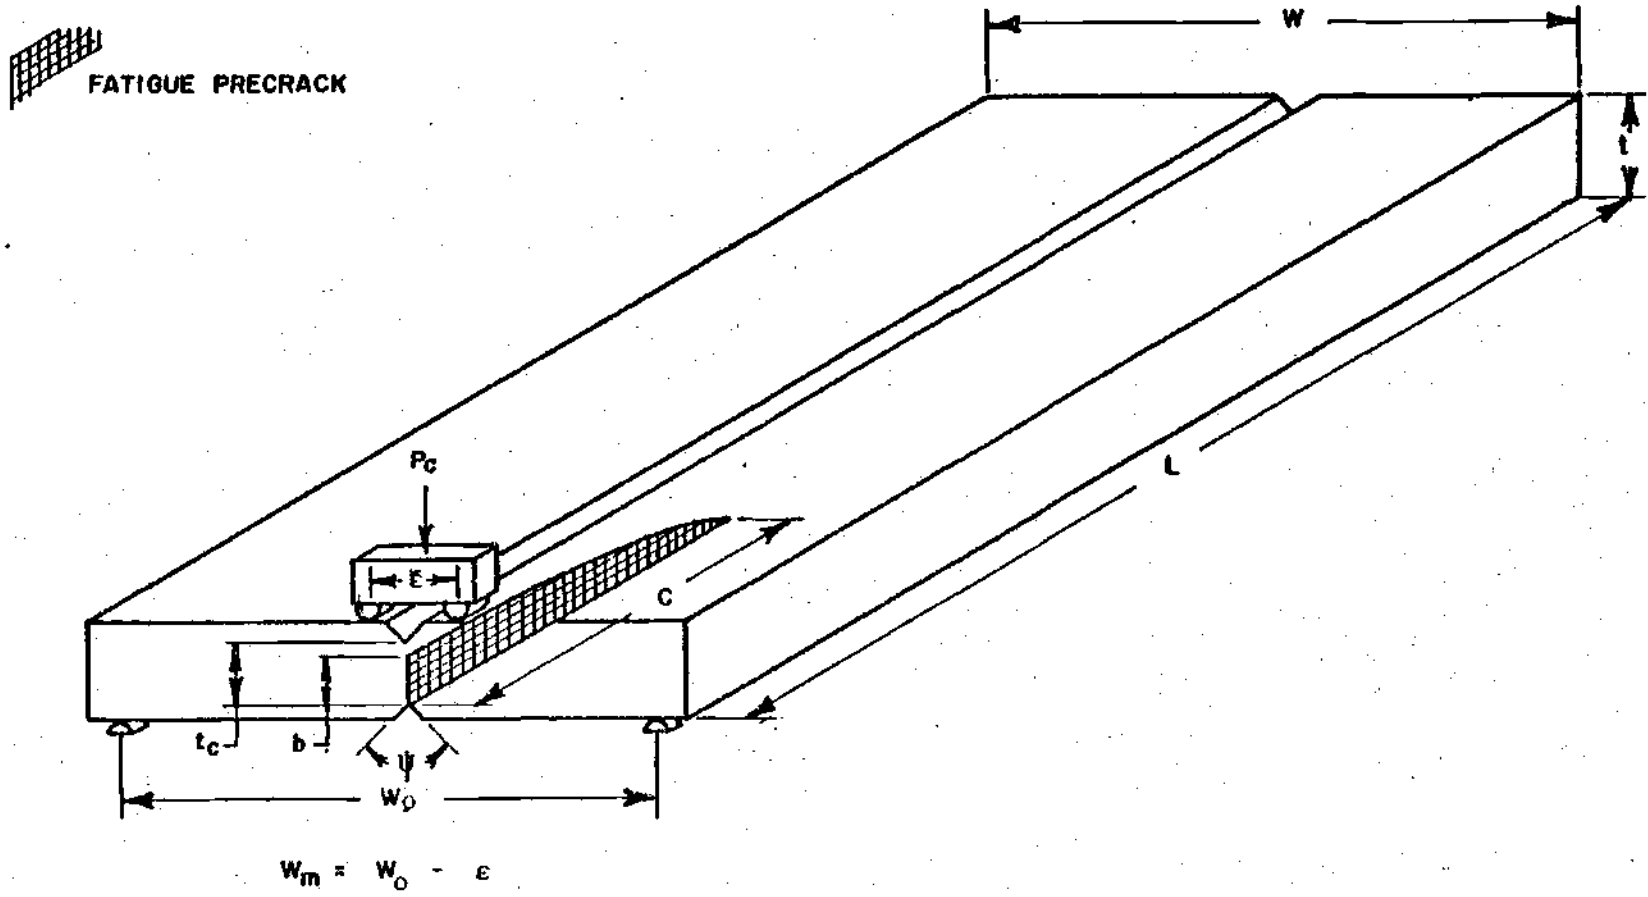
The Double Torsion Test Specimen Under Testing Conditions
